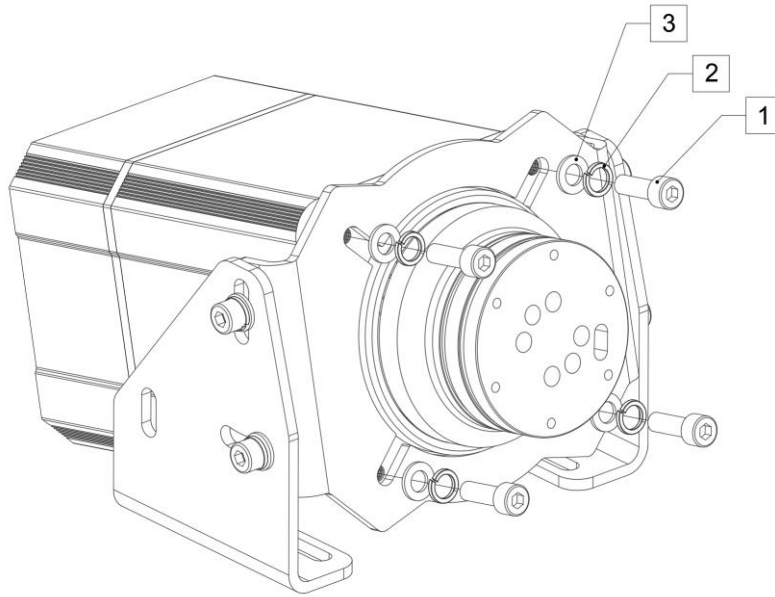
Mounting VNM Wheelbase using a mounting bracket
